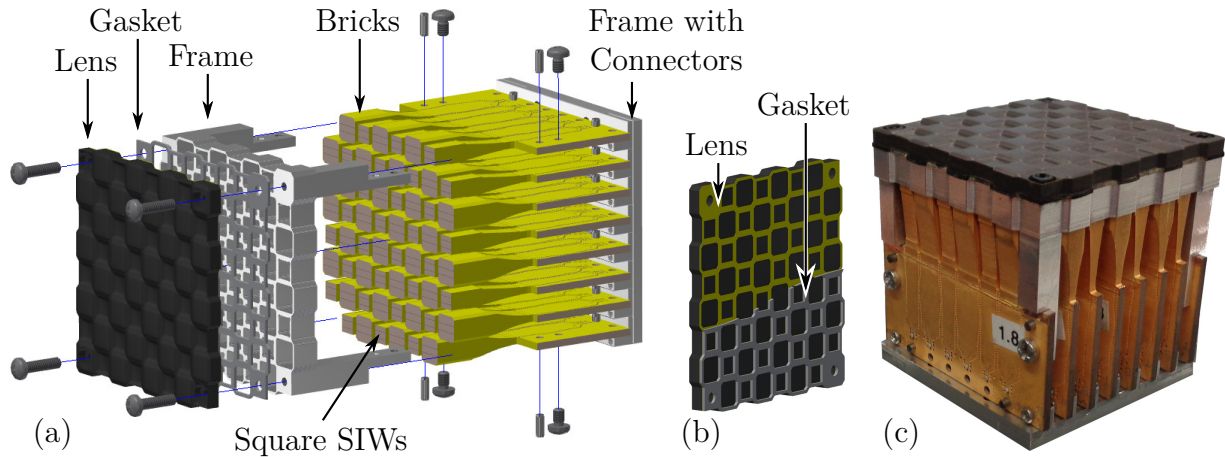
(a) Exploded view, (b) backside of the lens with gasket, and (c) photograph of the lens array antenna.
